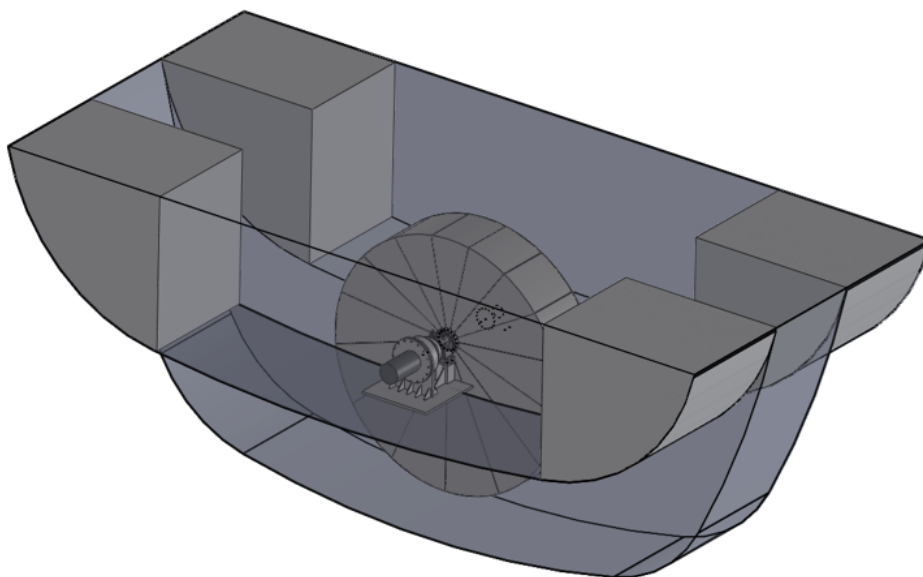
3D CAD model of the PeWEC C19A layout.
